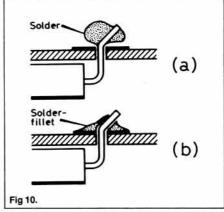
(a) A dry joint where the solder has not wetted the PCB pad. (b) Where the solder has not wetted the component lead.
